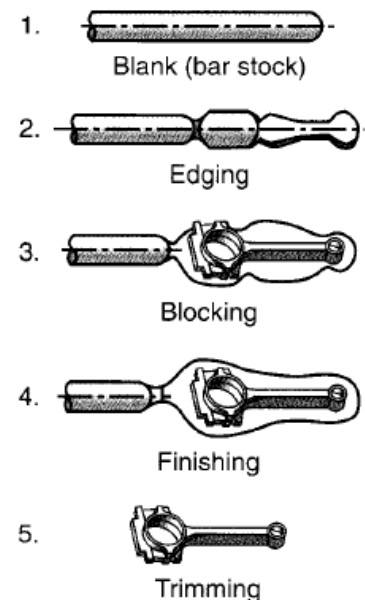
Stages in the forging of a connecting rod for an internal combustion engine [1].
